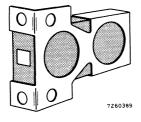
Dimensional drawing of mounting bracket (mounting number for separate delivery-10)
